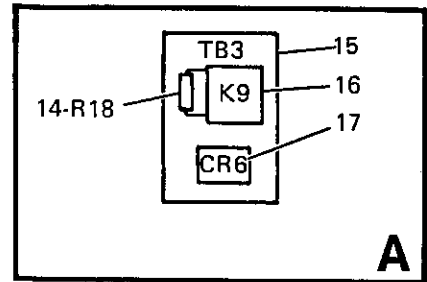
Replaceable Parts-Main Assembly (Sheet 2 of 4)
